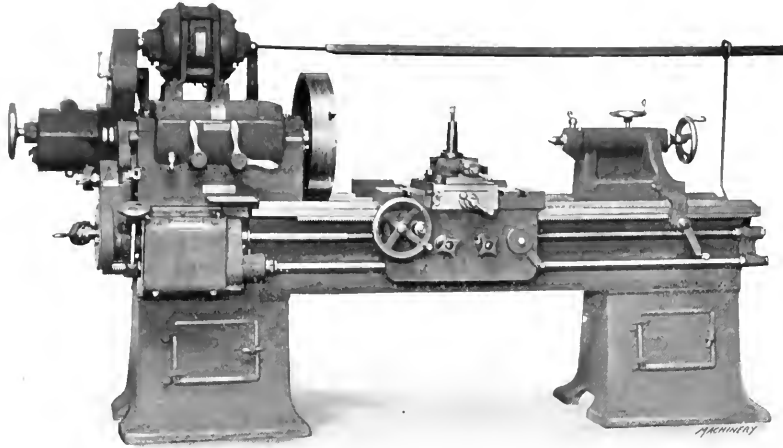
Whitcomb-Blaisdell Geared Head Lathe with Single Pulley Drive
